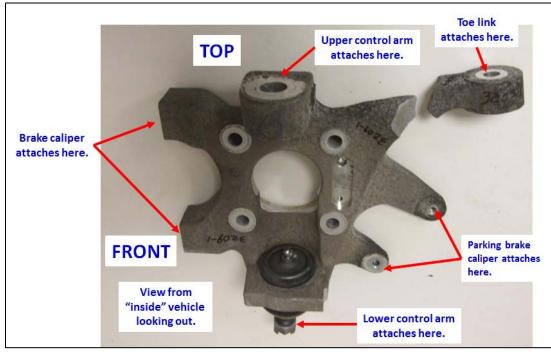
Right rear knuckle with fractured toe link attachment arm.
